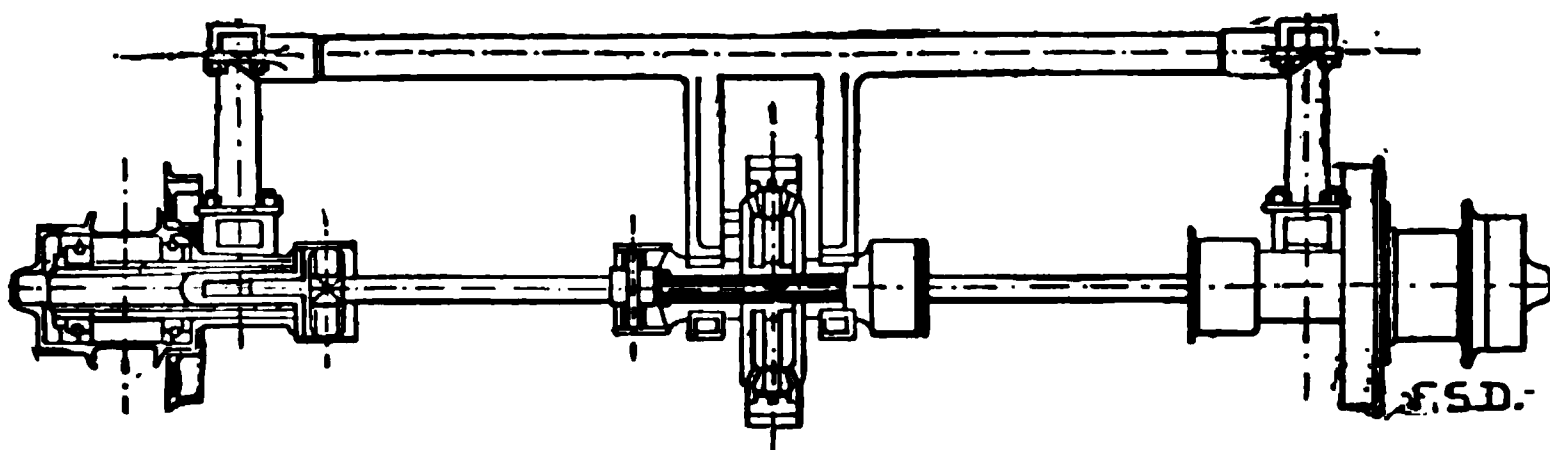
Jointed Rear Axle of the De Dion & Bouton Carriages. By the use of universal joints between the driving spur and wheel spindles a steady drive may be maintained between the spur, hung on the body, above the springs, and the wheels, below the springs, even on the roughest roads, when the springs are constantly in action.
